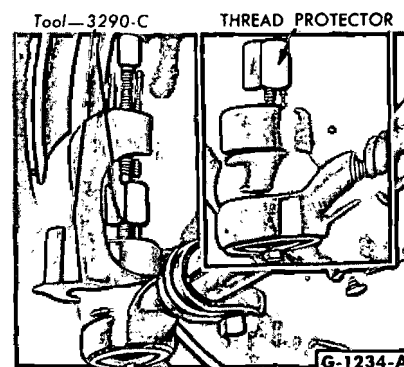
Disconnecting Steering Linkage Ball Stud—Typical
